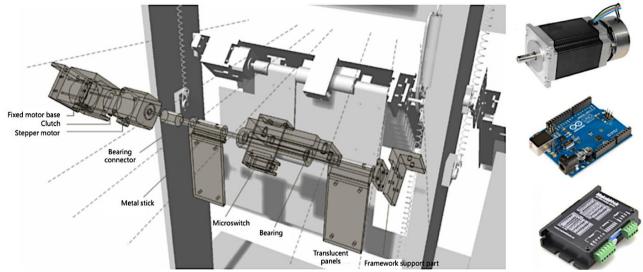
Exploration diagram of motor-driven mechanism assembly (left) and Electronic equipment used in façade unit, which is stepper motor, microcontroller unit and stepper motor controller (right).
